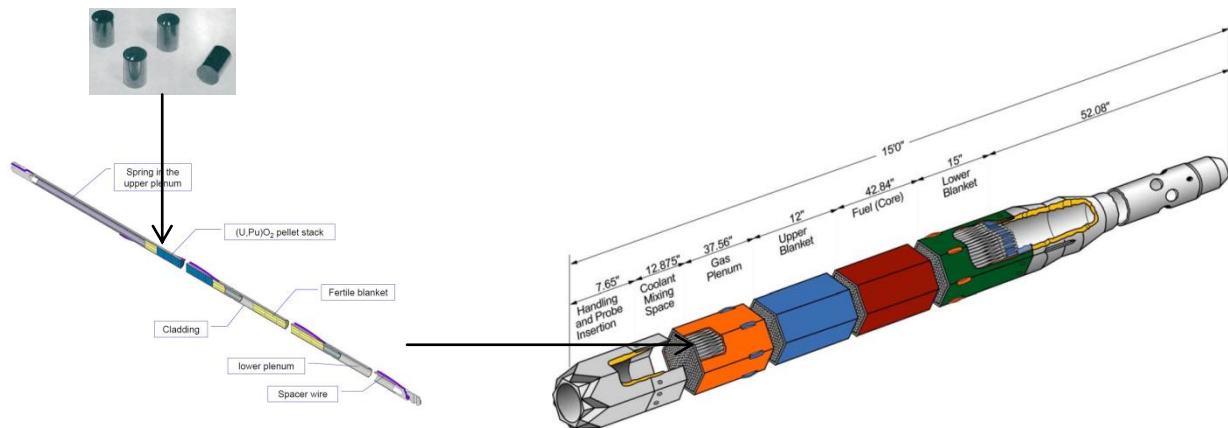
Pin and pin bundle assembly [114; 93; 115].
